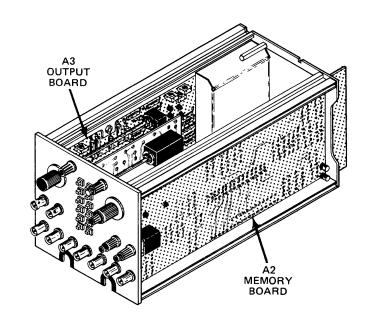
A3-Output circuit board. Component locations as viewed with board installed.
